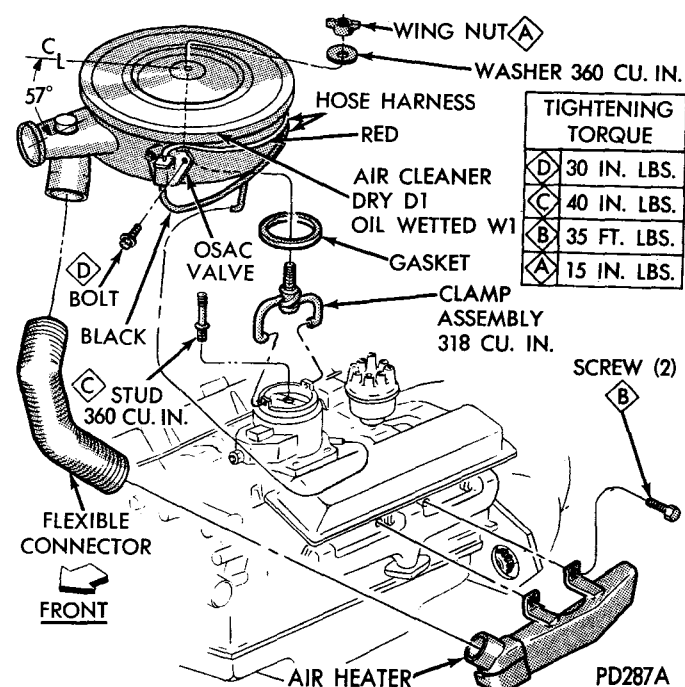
Carburetor Air Heater and Air Cleaner 318 and 360 Cubic Inch Engines (D100 and W100)
